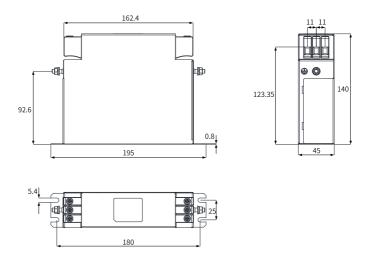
Filter dimensions (FN3288-16-44) (unit: mm)
